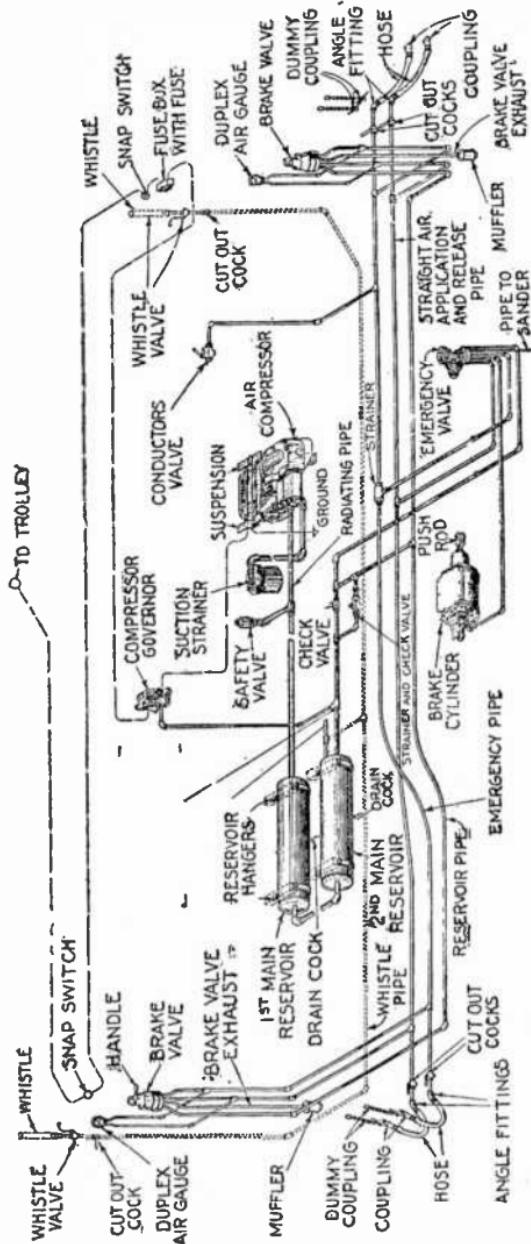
,304.—Westinghouse emergency straight air brake. Pictorial view showing parts and pipe connections.
